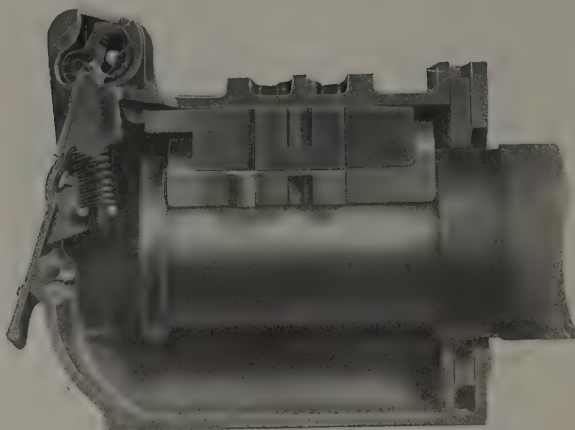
McCord 5 in. by 9 in. Journal Box with M. C. B. Dust Guard and Wedge; Lid in Closed Position, Showing Locking Lips.
